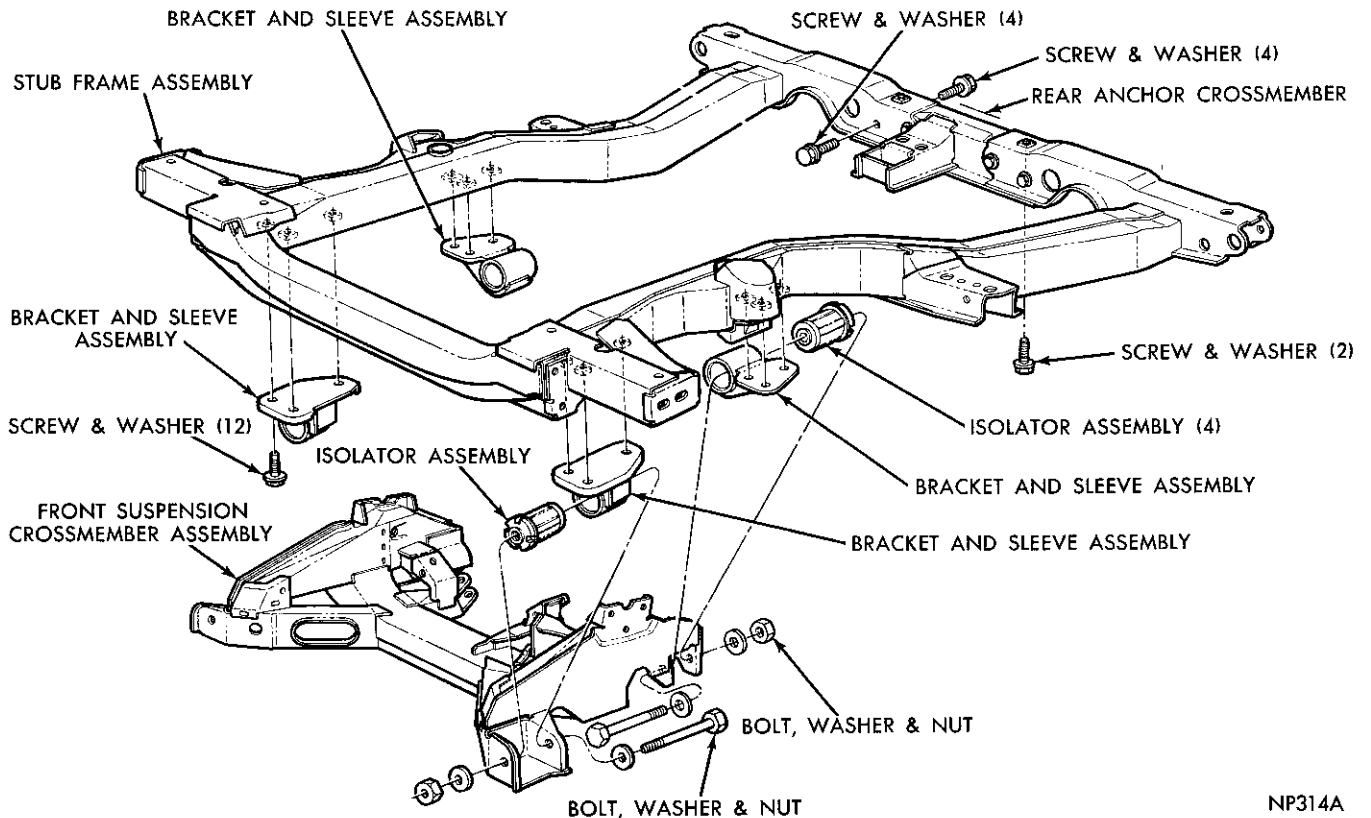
Rubber Isolated Front Crossmember and Stub Frame Assembly
